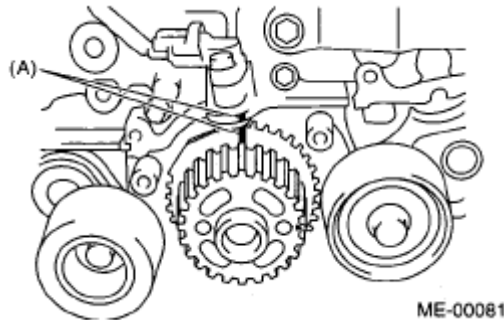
Aligning Mark On Crank Sprocket With Mark On Oil Pump Cover Cylinder Block
